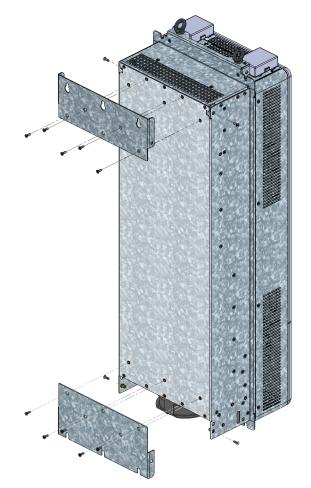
Repositioning the mounting supports - frame sizes F, G and H
